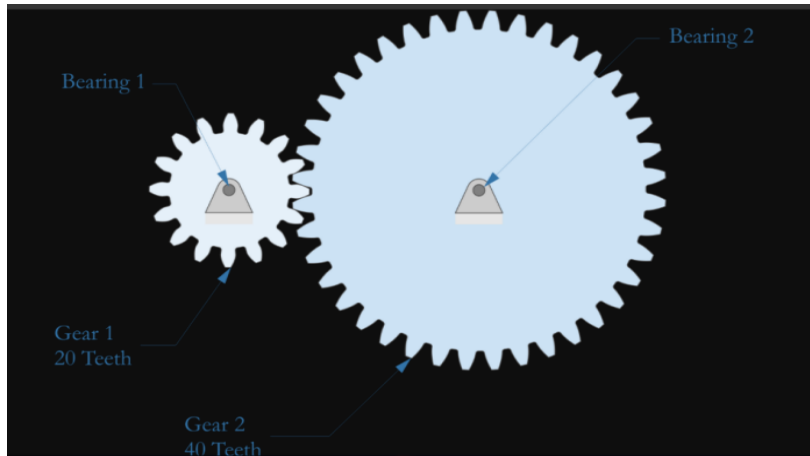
Diagram showing Gear 1 with 20 teeth and Gear 2 with 40 teeth.
